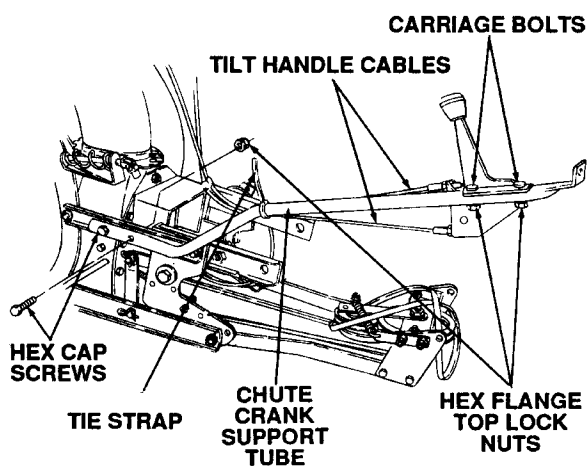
Installing Chute Crank Support Tube and Tilt Handle.
